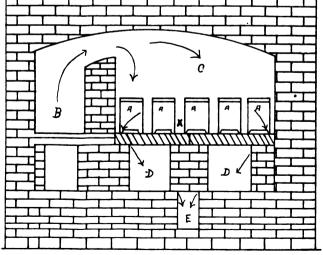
SECTIONAL VIEW OF THE CORRECT STYLE
